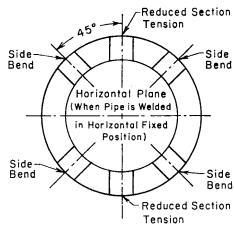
Order of Removal of Test Specimens from Welded Pipe or Cylindrical Castings over ¾ in. [19.0 mm] Thick (May be Used for Thicknesses ¾ to ¼ in. [9.5 to 19.0 mm])
